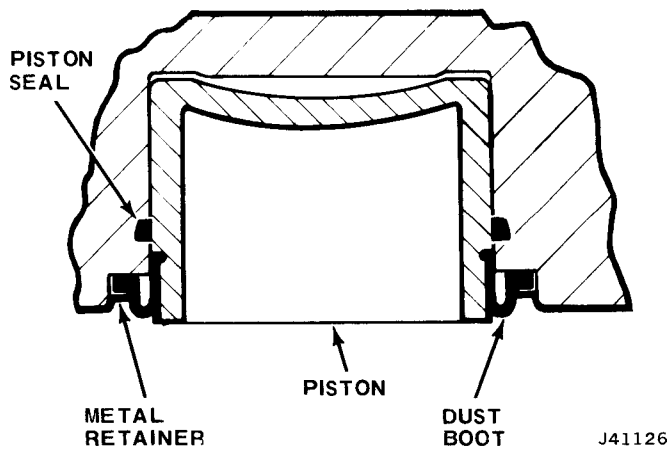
Cross Section of Caliper Cylinder and Piston
